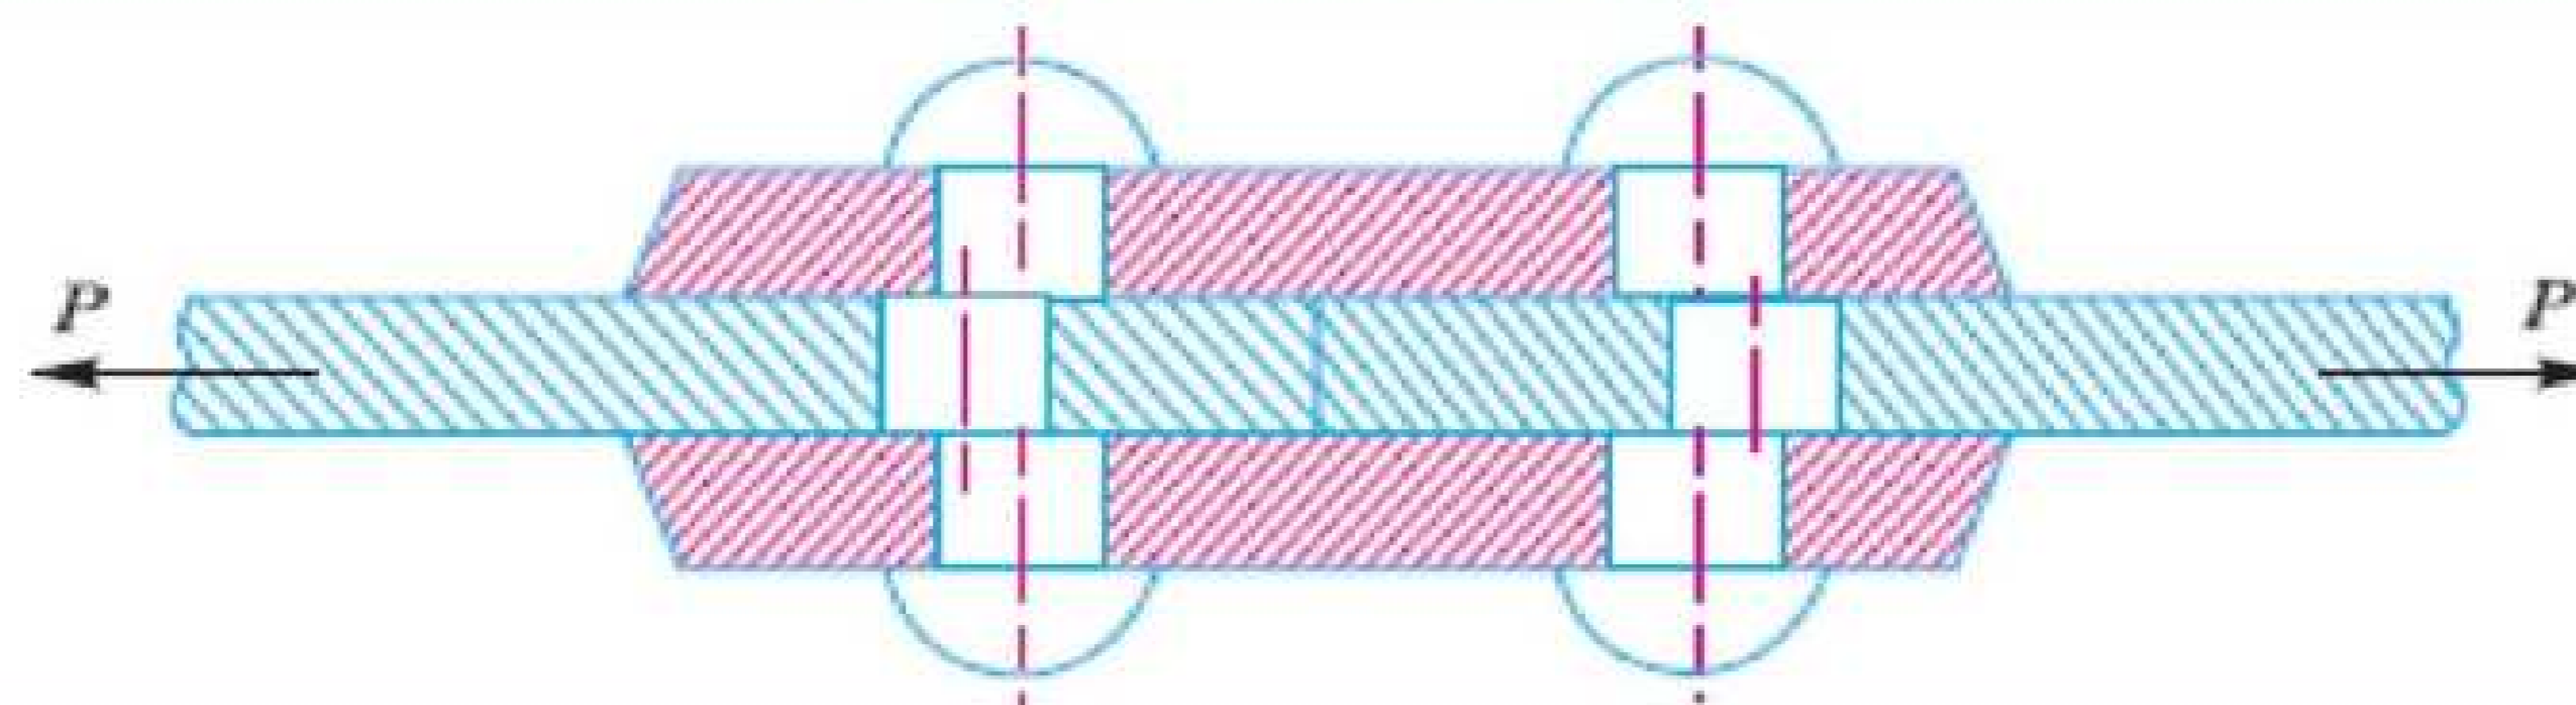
Shearing off a rivet in double cover butt joint.
